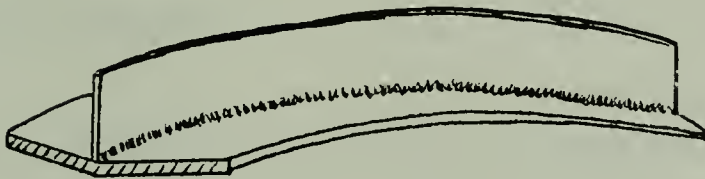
FUNDAMENTAL WELDING DISTORTIONS⁶
